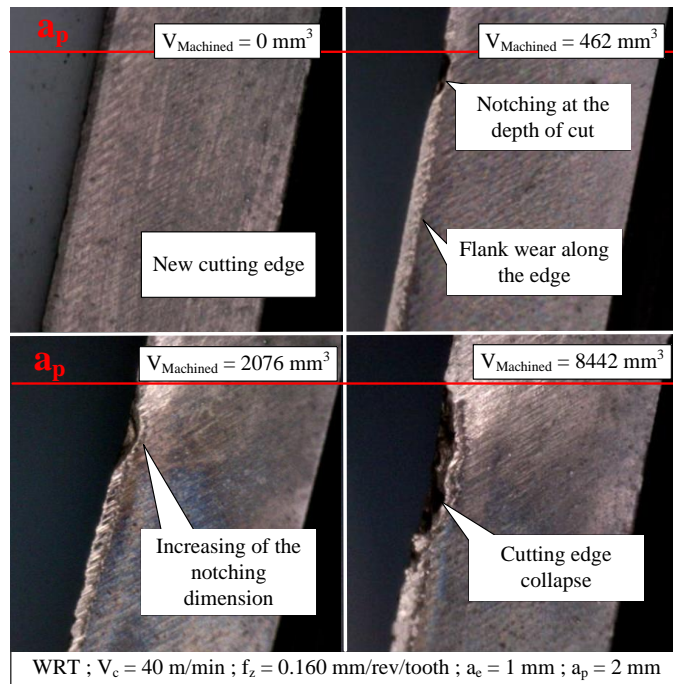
Tool wear characterisation in end milling of WRT Inconel 718.
